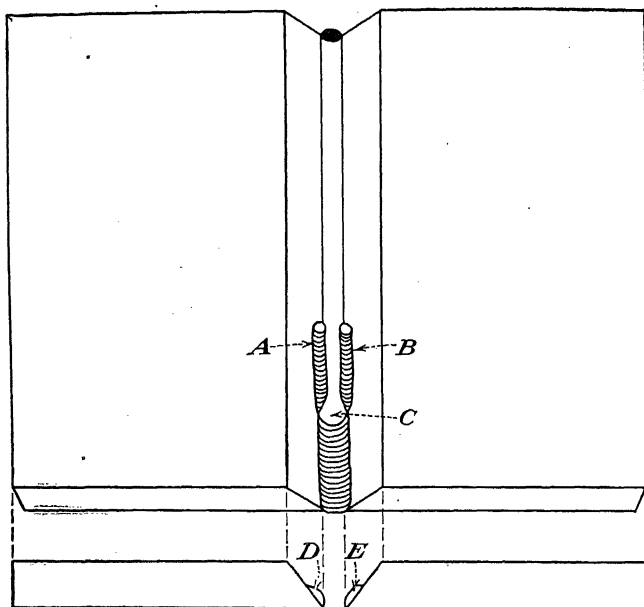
Butt weld. *A, B.* Stringer beads made just above the bottom edges of the bevels on the forward travel of the V motion. *D, E.* End views of the stringer beads. *C.* The crater that must be maintained in front of the puddle.
